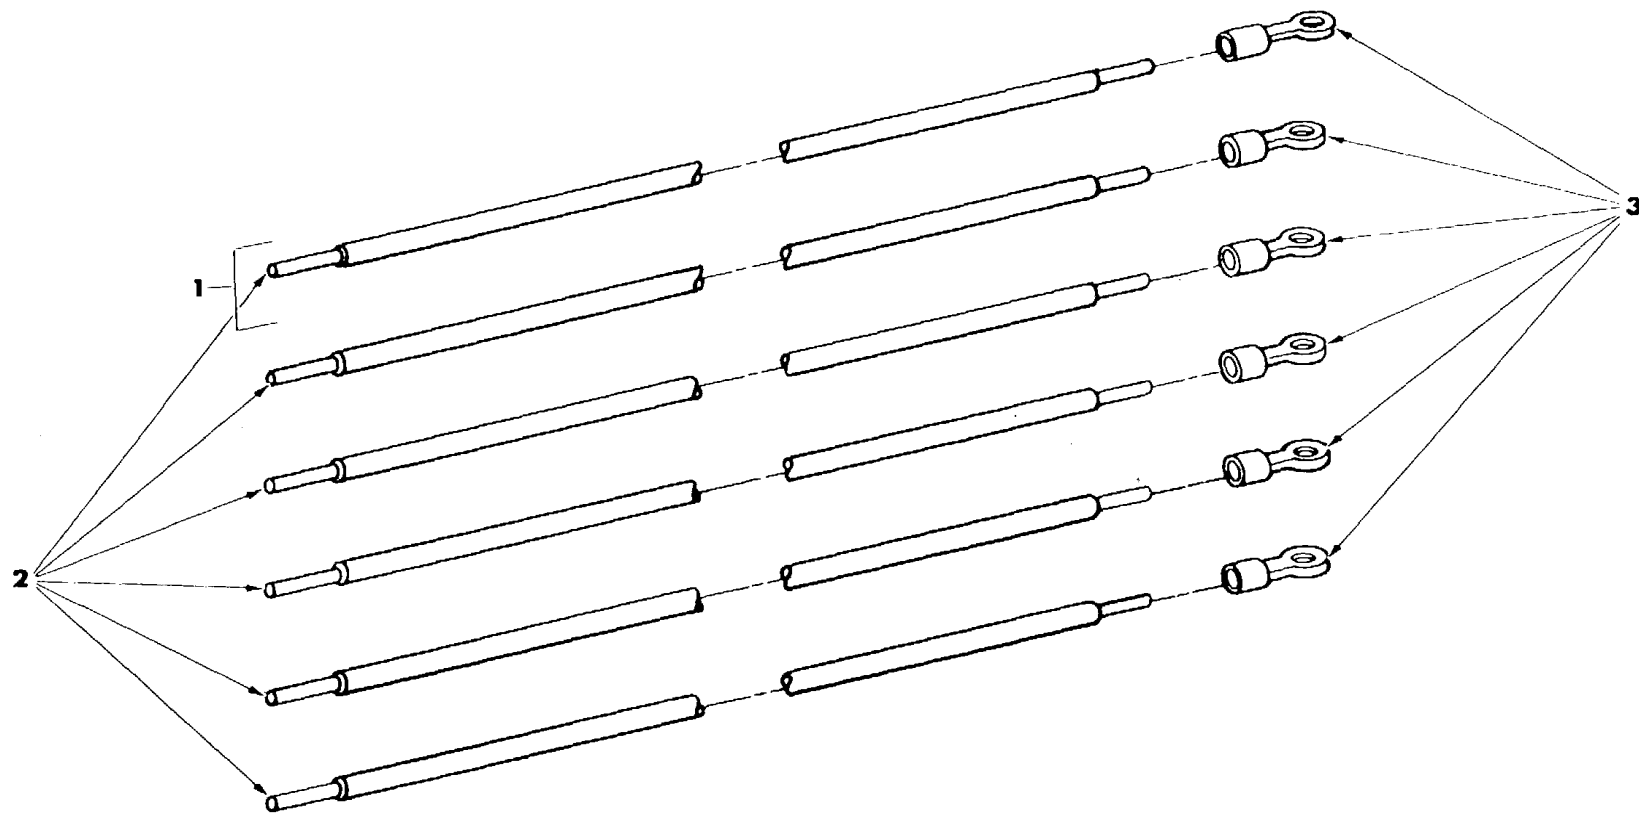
Cable assembly, special purpose, electrical 12011687; connector, plug, electrical MS90557C32412S; connector, plug 12011688; and cable assembly 12011638.
